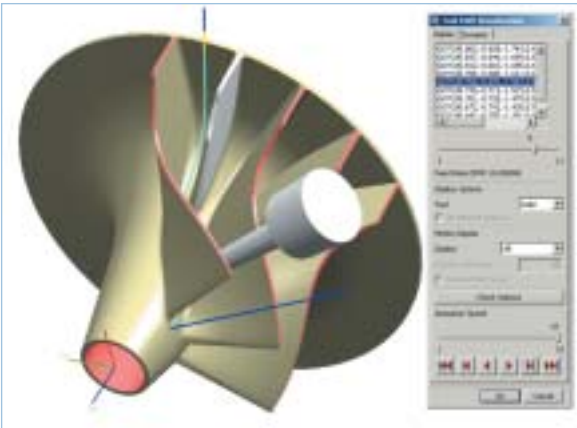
NX CAM machines high-tolerance surfaces with complicated twists. Best-in-class solutions are available for milling, turning, wire EDM, mold, and sheet metal. Here a tool path is visualized to check for possible crashes.
